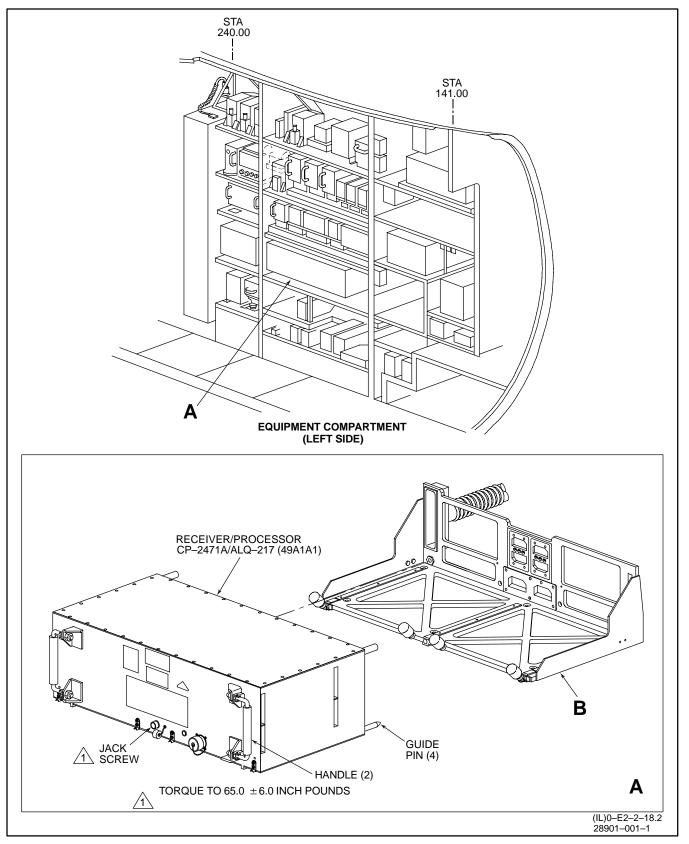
Removal and Installation of Receiver/Processor CP-2471A/ALQ-217 (49A1A1) and Electronic Equipment Mounting Base MT-7247/ALQ-217A (49A1) (Sheet 1 of 2)
